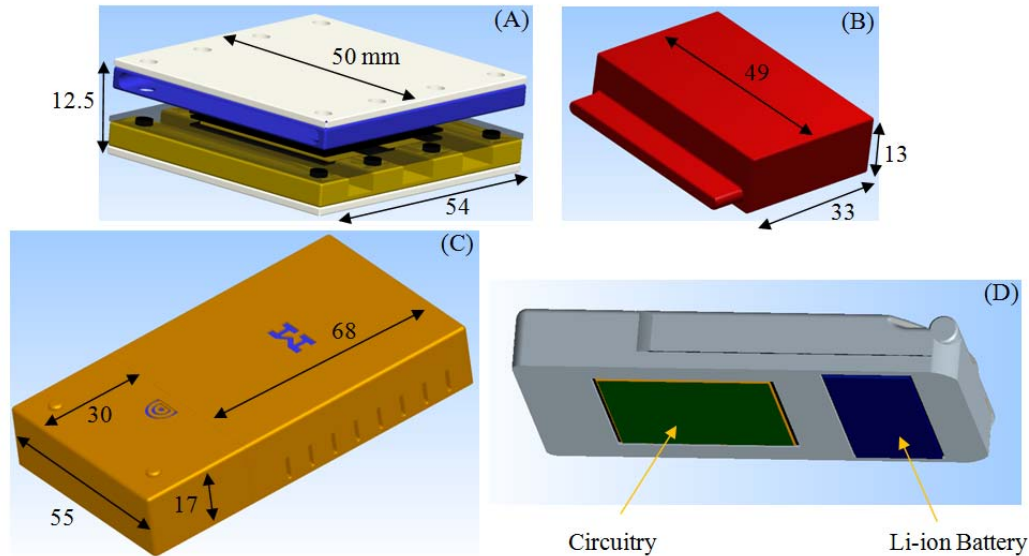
Components of the Hybrid Cell Phone; (A) Fuel Cell Assembly (B) Methanol Fuel Tank (C) Outer Packaging Case (D) Cellular Phone with Integrated Parts; All measurements shown are in millimeters
